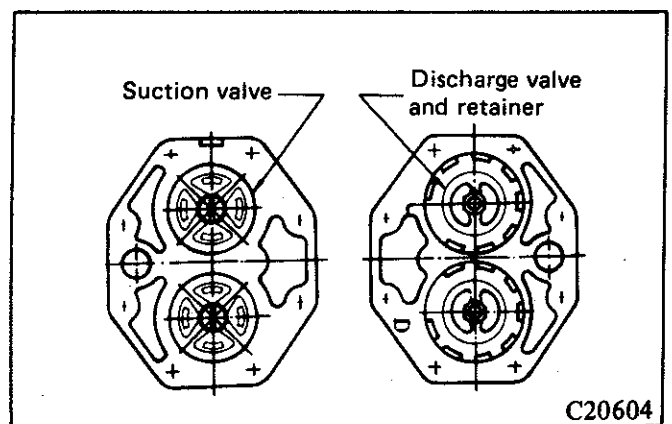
Discharge valve, retainer and suction valve mounting positions
